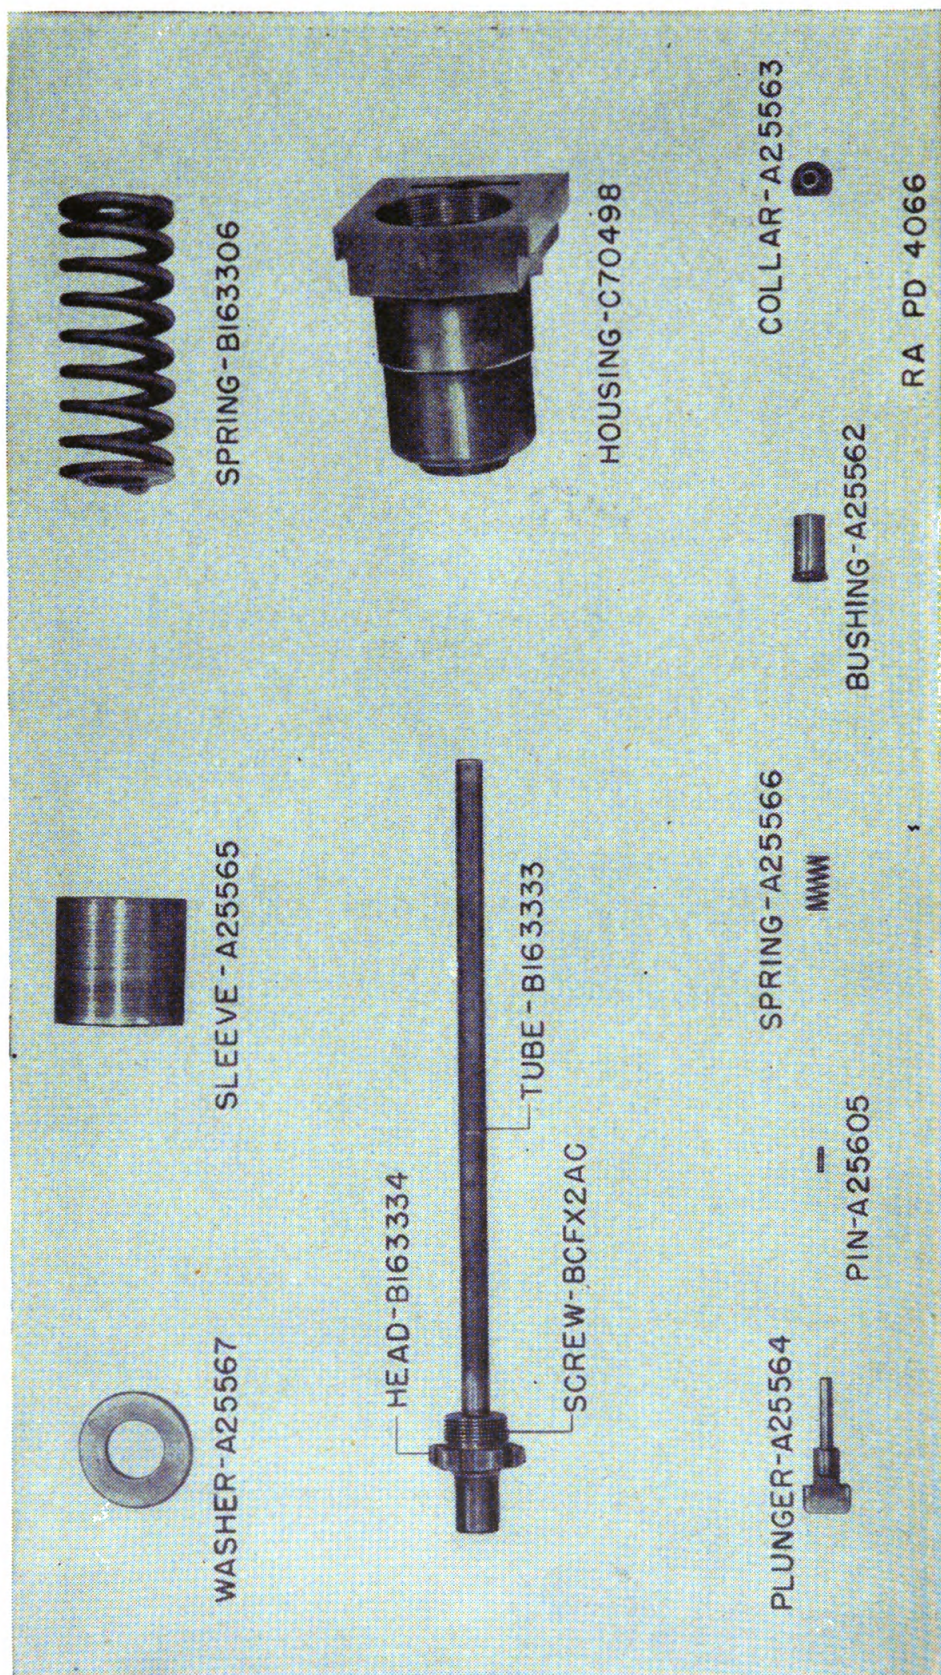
20-mm automatic gun M2, driving spring guide and rear buffer group parts.
